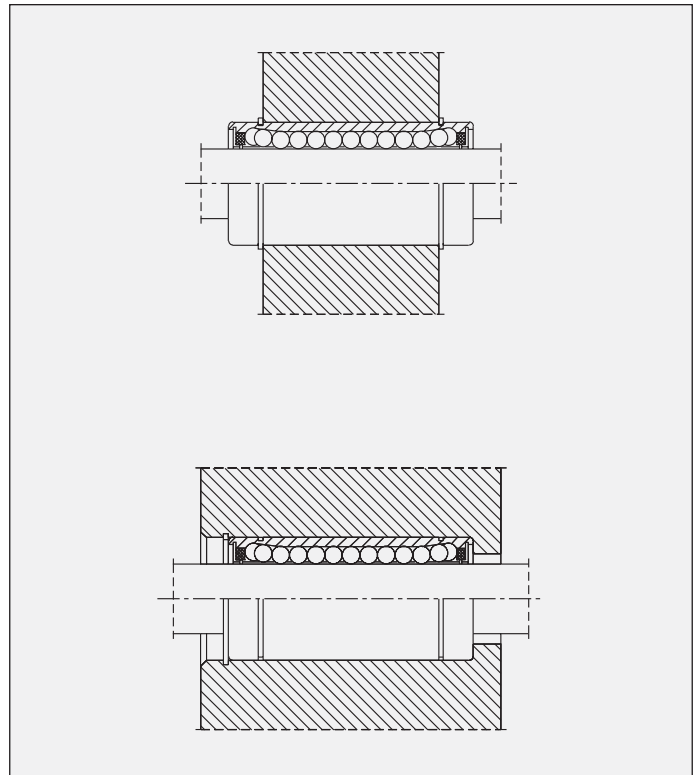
Series KNZ Linear Ball Bearings - Possible Methods Of Axial Location
